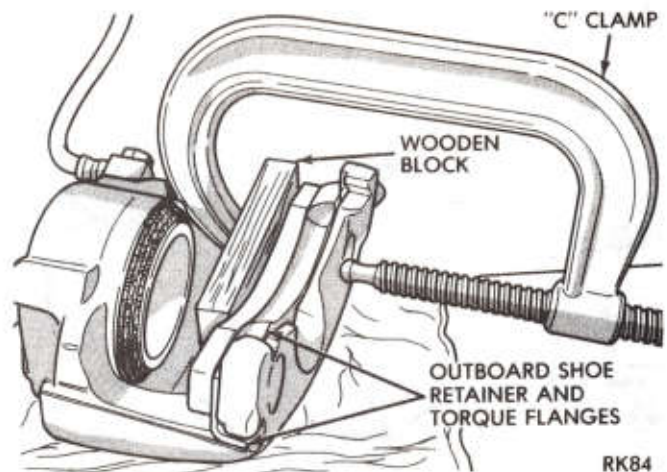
Pressing Outboard Shoe onto Caliper Arms with "C" Clamp
